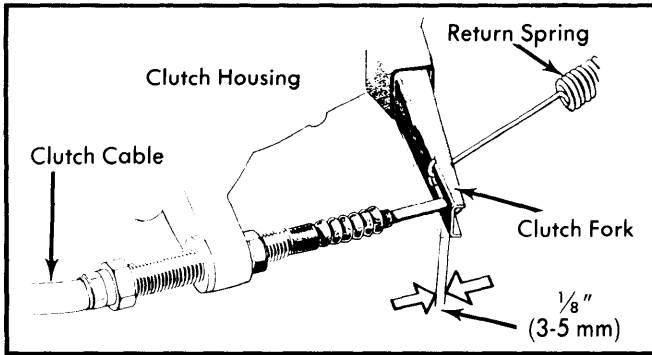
Measuring Clutch Fork Free Play (240 with Mechanical Linkage Shown)
